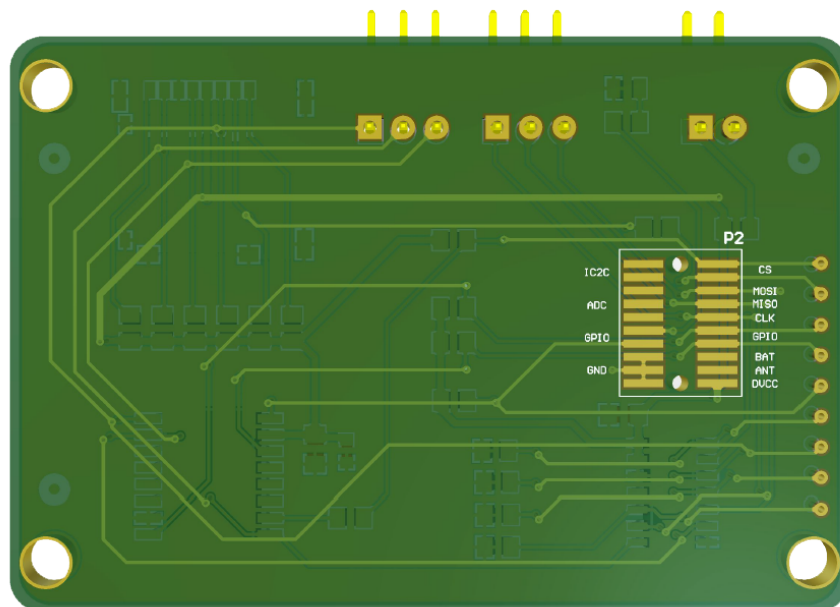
Bottom 3D view of the DB Memory PCB.
